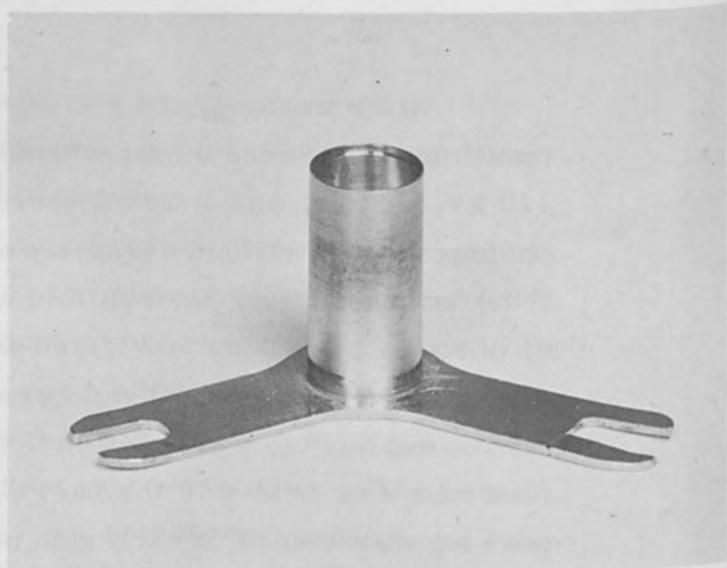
Molybdenum tube welded to tungsten flange member
